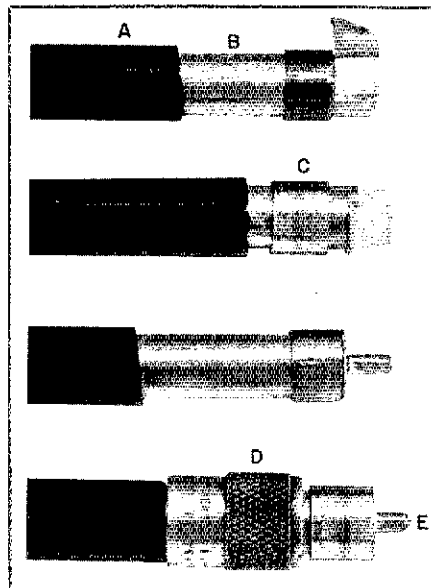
Shown here is the construction of a homemade, 50-ohm, constant-impedance connector for 1/2-in-diam aluminum-jacketed Hardline. In the sequenced steps presented here, the first three stages do not show the presence of part D, the threaded sleeve, or shell, as it appears on the finished product. The threaded sleeve must be put on first, before the 9/16-inch sleeve (part C). Parts A and B are the coaxial cable outer jacket and outer conductor, respectively. Part C is the spacer sleeve (see text). The coaxial cable center conductor (part E) is 0.159-inch OD and will enter an SO-239 receptacle, but should be filed down to 0.154 inch.
